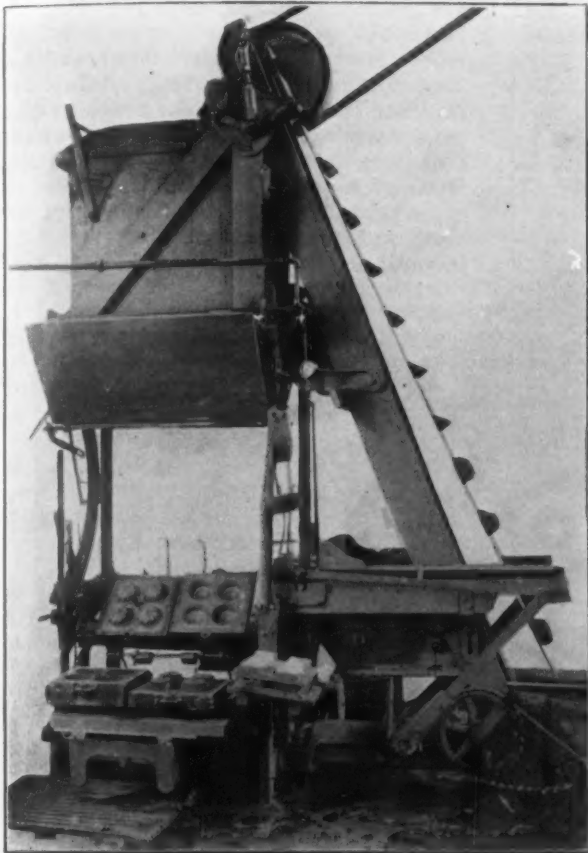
The Automatic Power Molding Machine Built by the Arcade Mfg. Company, Freeport, Ill.
